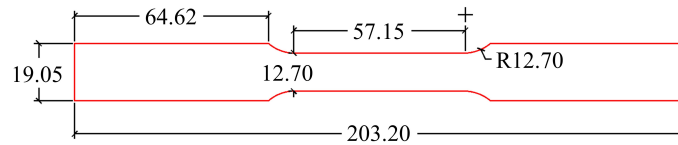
Nominal dimension of the tensile specimen (unit: mm).
